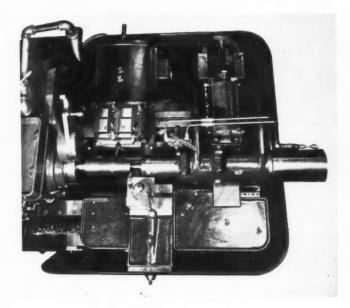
Sundstrand Automatic Lathe Equipped for Machining 3-inch Shells
